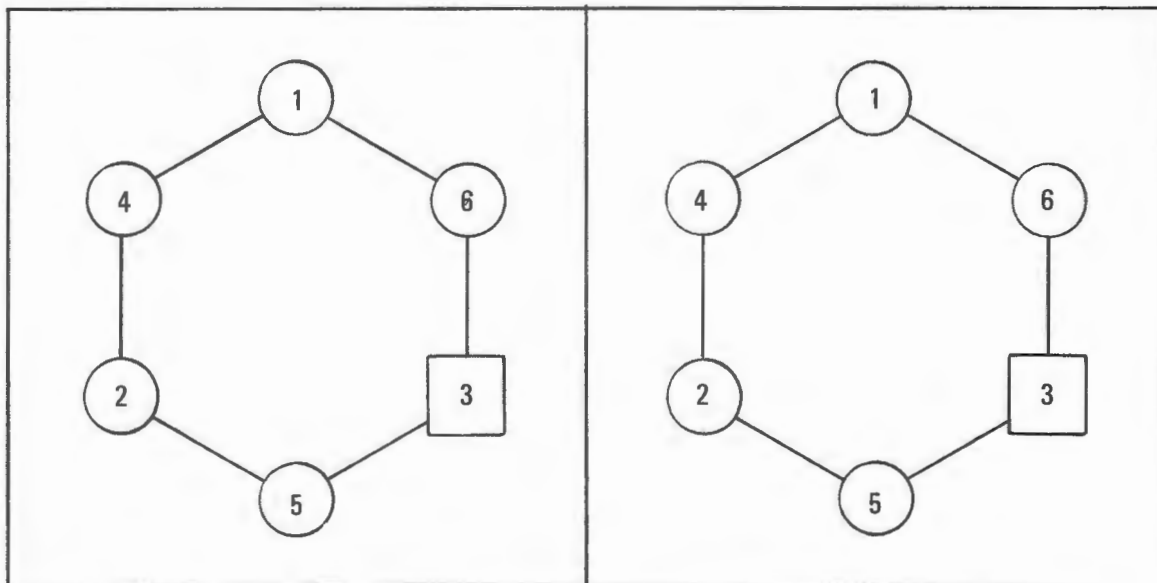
CYLINDER HEAD BOLT TORQUING SEQUENCE
